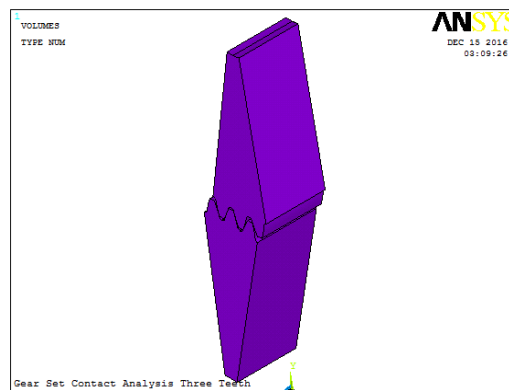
Illustrate the 3D models of spur gear pair engaged position.
